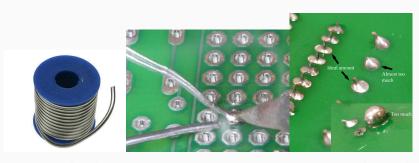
(Left) Solder, used to bind components to board. (Middle) Example of soldering iron causing solder to flow onto the heated hole. (Right) Exampls of correct and incorrect soldering.
